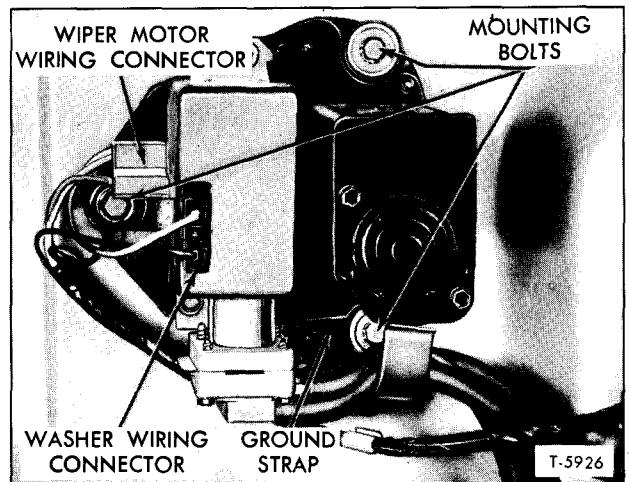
Wiper Motor Installed (Series 70 Conventional Cab)
